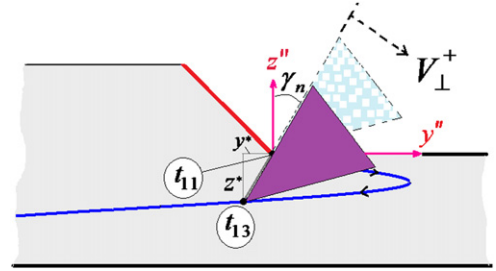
Disengagement and reengagement of cutting tool according to the 2nd criterion.
